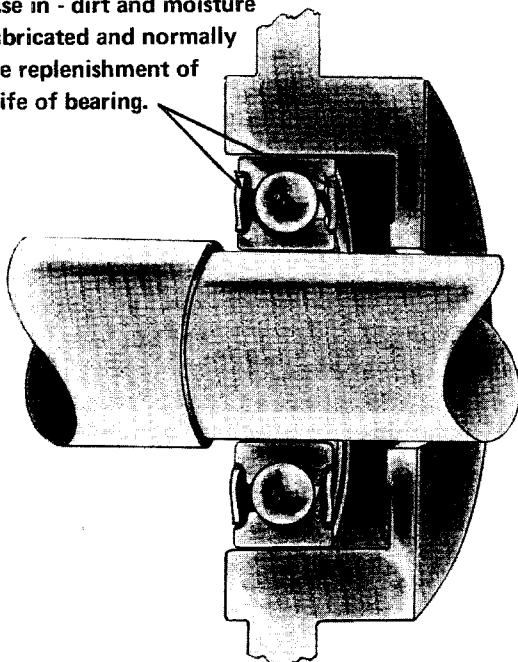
TYPICAL "SEALED" BEARINGS & BEARING HOUSING CONSTRUCTION.
